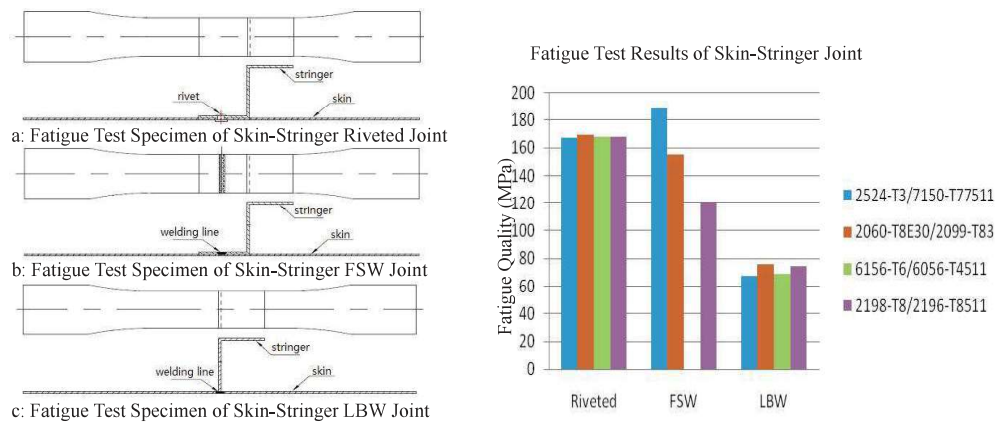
Test Results of Skin-Stringer Rivet Joint / Welded Joint
